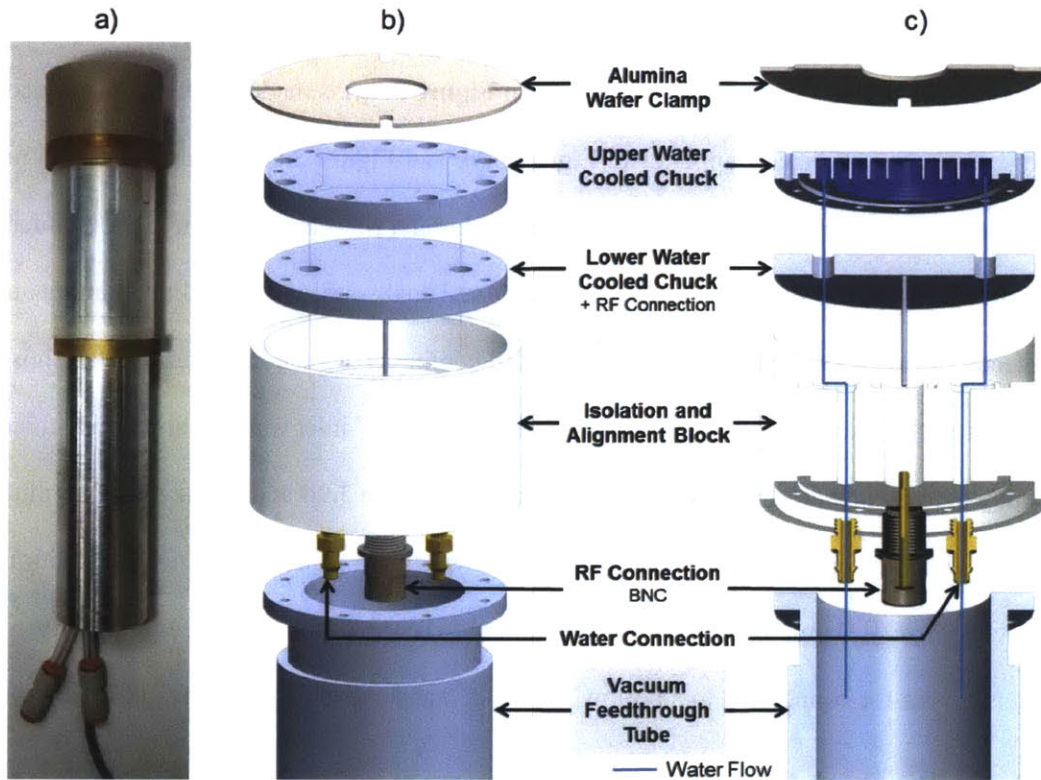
The chuck assembly. Part a) shows the actual assembly used the system, b) shows the assembly view of the components, and c) provides a cross-sectional view of each component. Individual components are described and shown in the text and subsequent figures.
